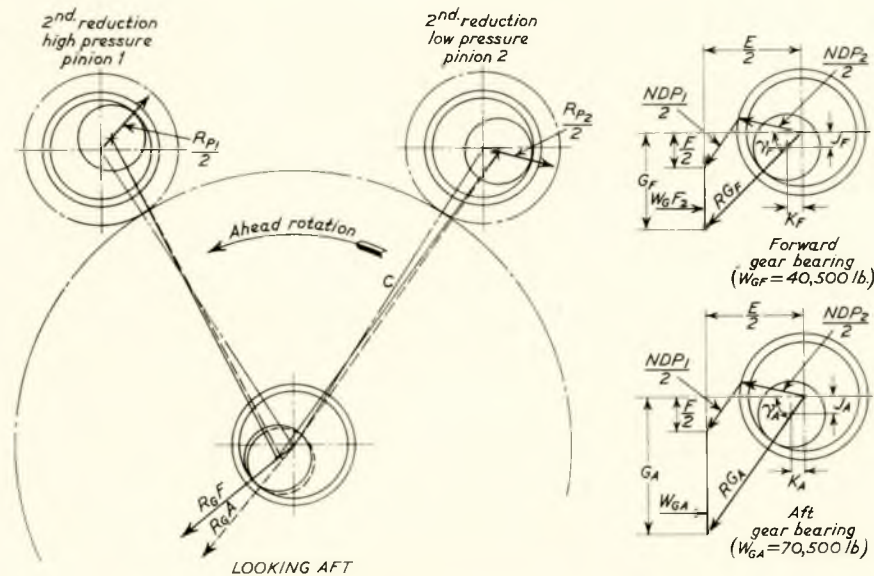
Bearing reaction with 30,000-lb. unequal bearing load at 100 per cent torque
